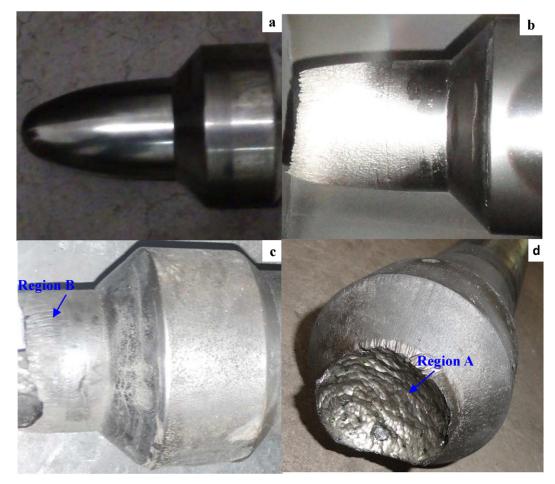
Photographs of valve spools: (a) initial state with 60% valve opening; (b) minor damage state with 40% valve opening; (c) serious damage state with 20% valve opening; (d) appearance of damaged surface.
